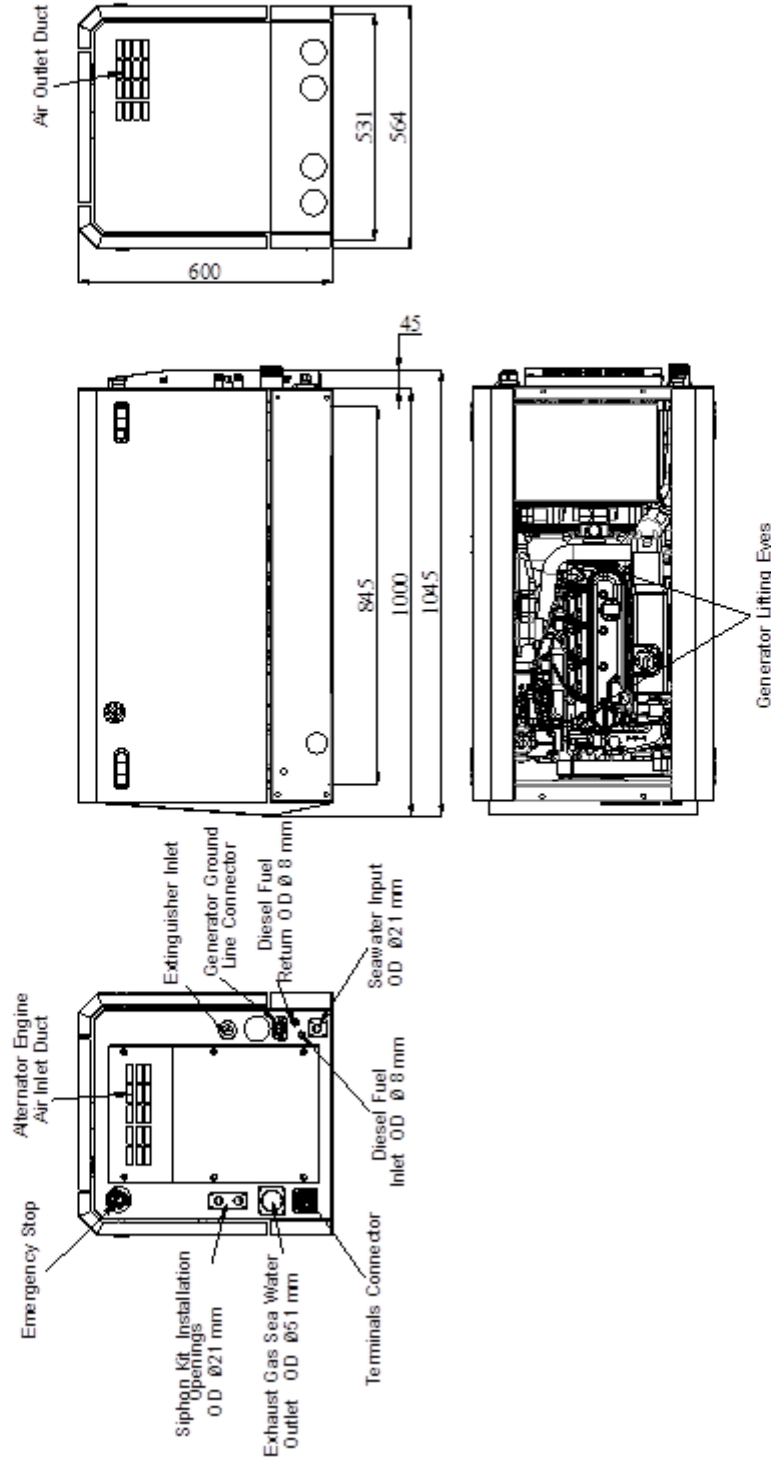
GENERATOR SET DIMENSIONS - MN 305
